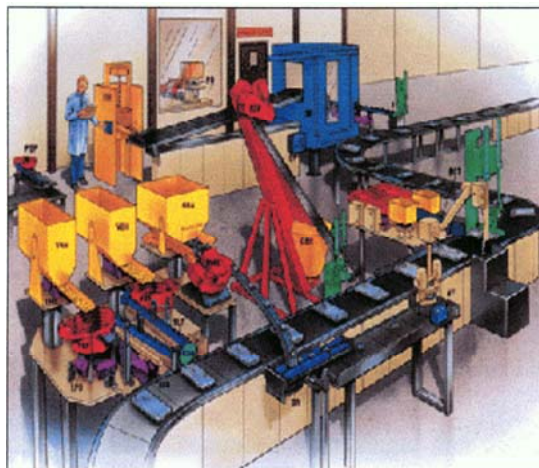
The VBF Parts Feeder in Assembly (Cullinan, 2005)
